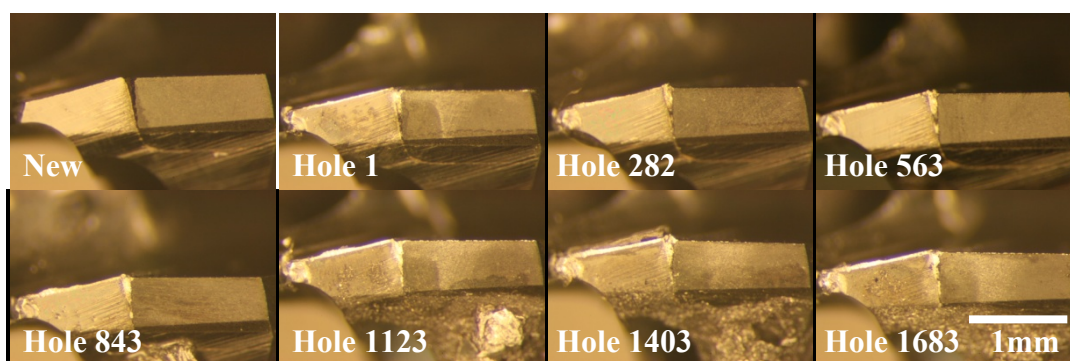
Tool wear micrographs of brazed PCD CTM302 drill under 3bar cutting fluid, 260m/min cutting speed (Test 8)
